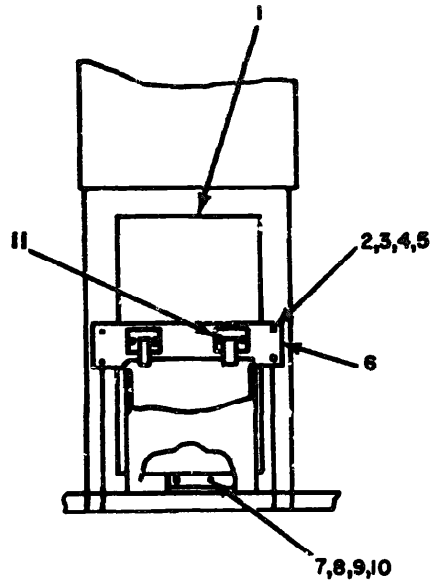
Message Center OA-3986/TSC-26(1) Raceway Installation (A23A2), Tile-Light Fixture Installation
